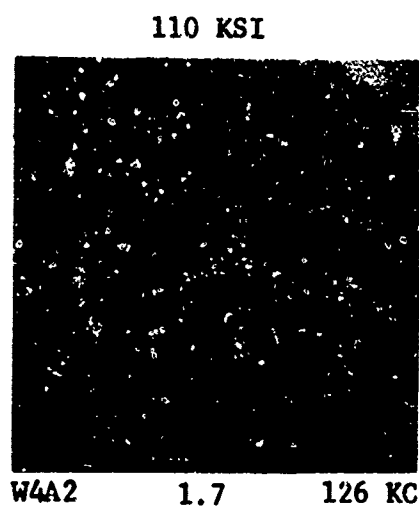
Fracture Surfaces of Failed Fatigue Specimens Series U4-Double-Bond/Single-Axis Diffusion Bonded with Multiple 0.020" Dia. Surface Voids
